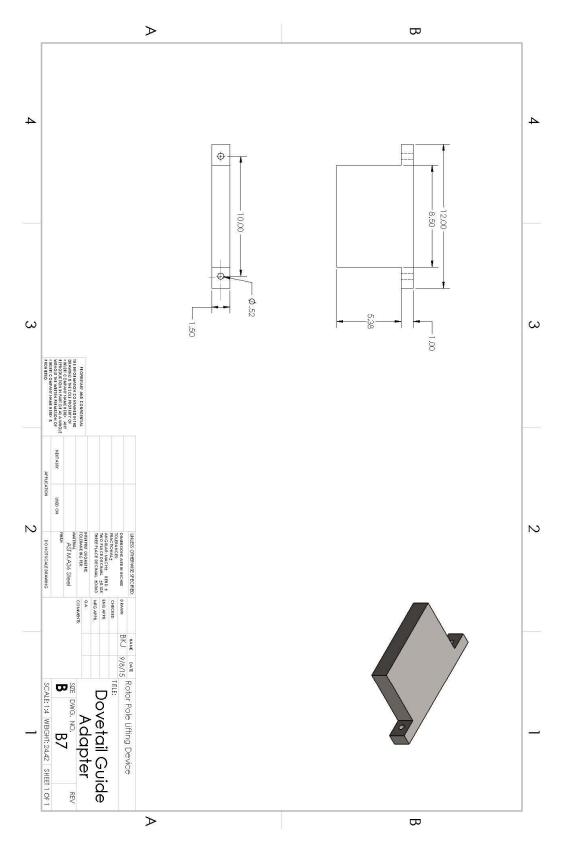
DRAWING OF DOVETAIL GUIDE ADAPTER
